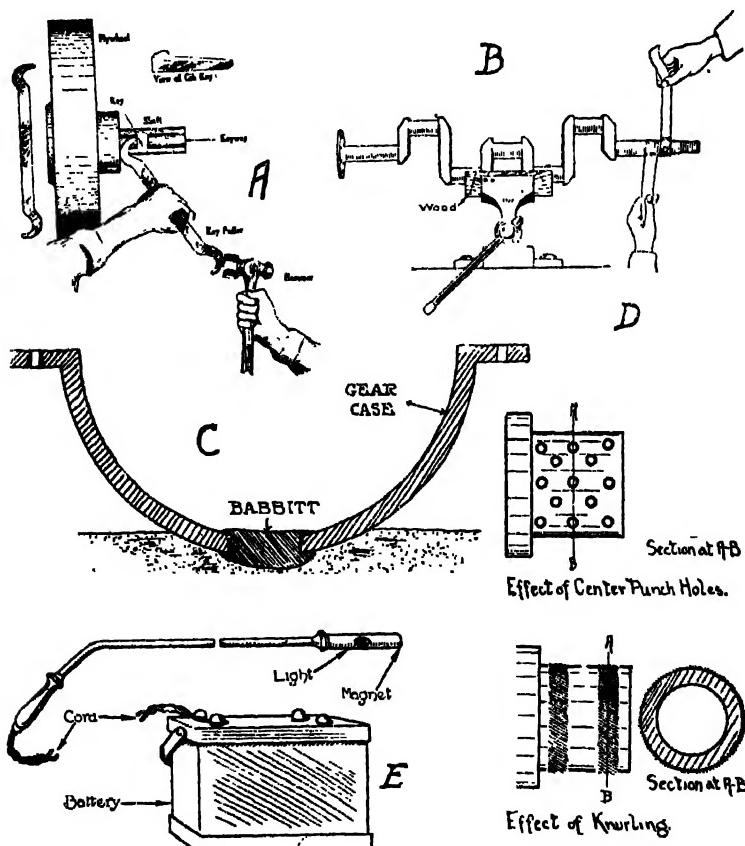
A—Removing Jib Key. B—Method of Truing Crankshaft. C—Repair of Gear Case with Babbitt Metal. D—Use of "Putting-On" Tool. E—Illuminated Magnet.
